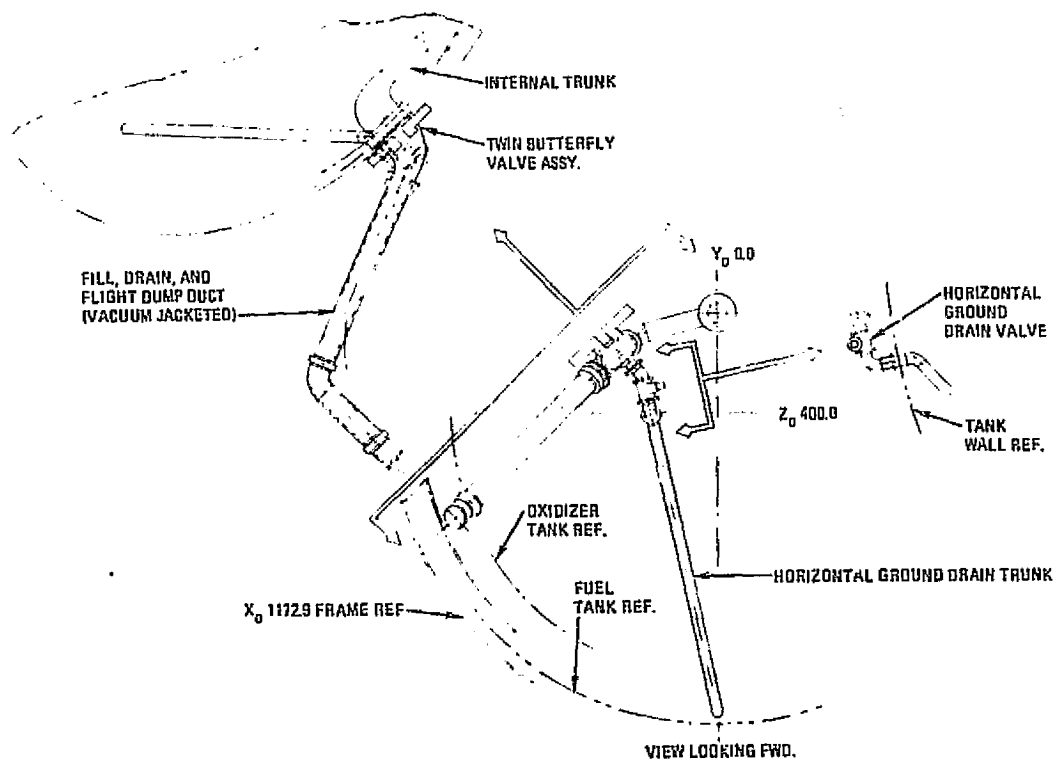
Fuel Fill, Drain, Flight Dump, and Horizontal Ground Drain Arrangement
